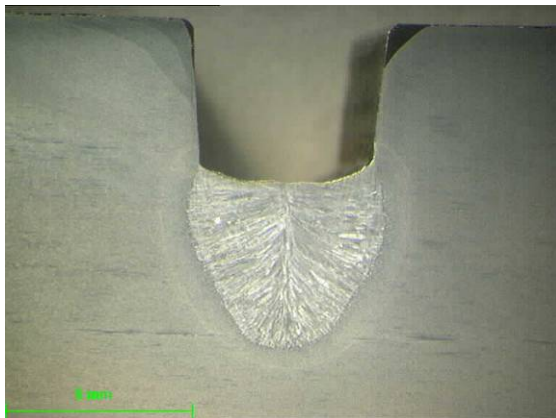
Welding Parameter Trials / Flat Position
